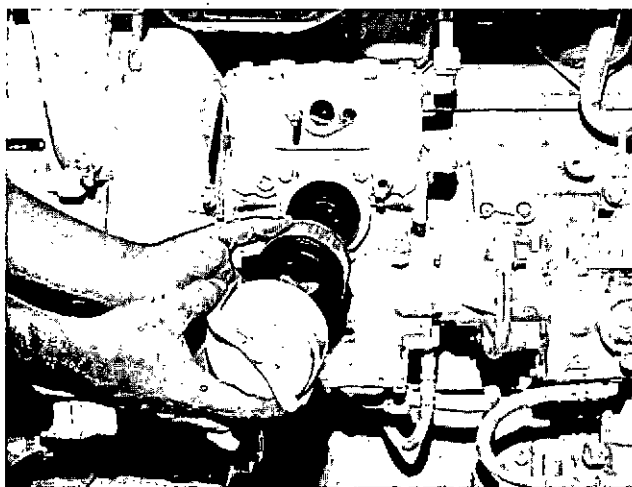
Bendix-Westinghouse air compressor breather V414210
